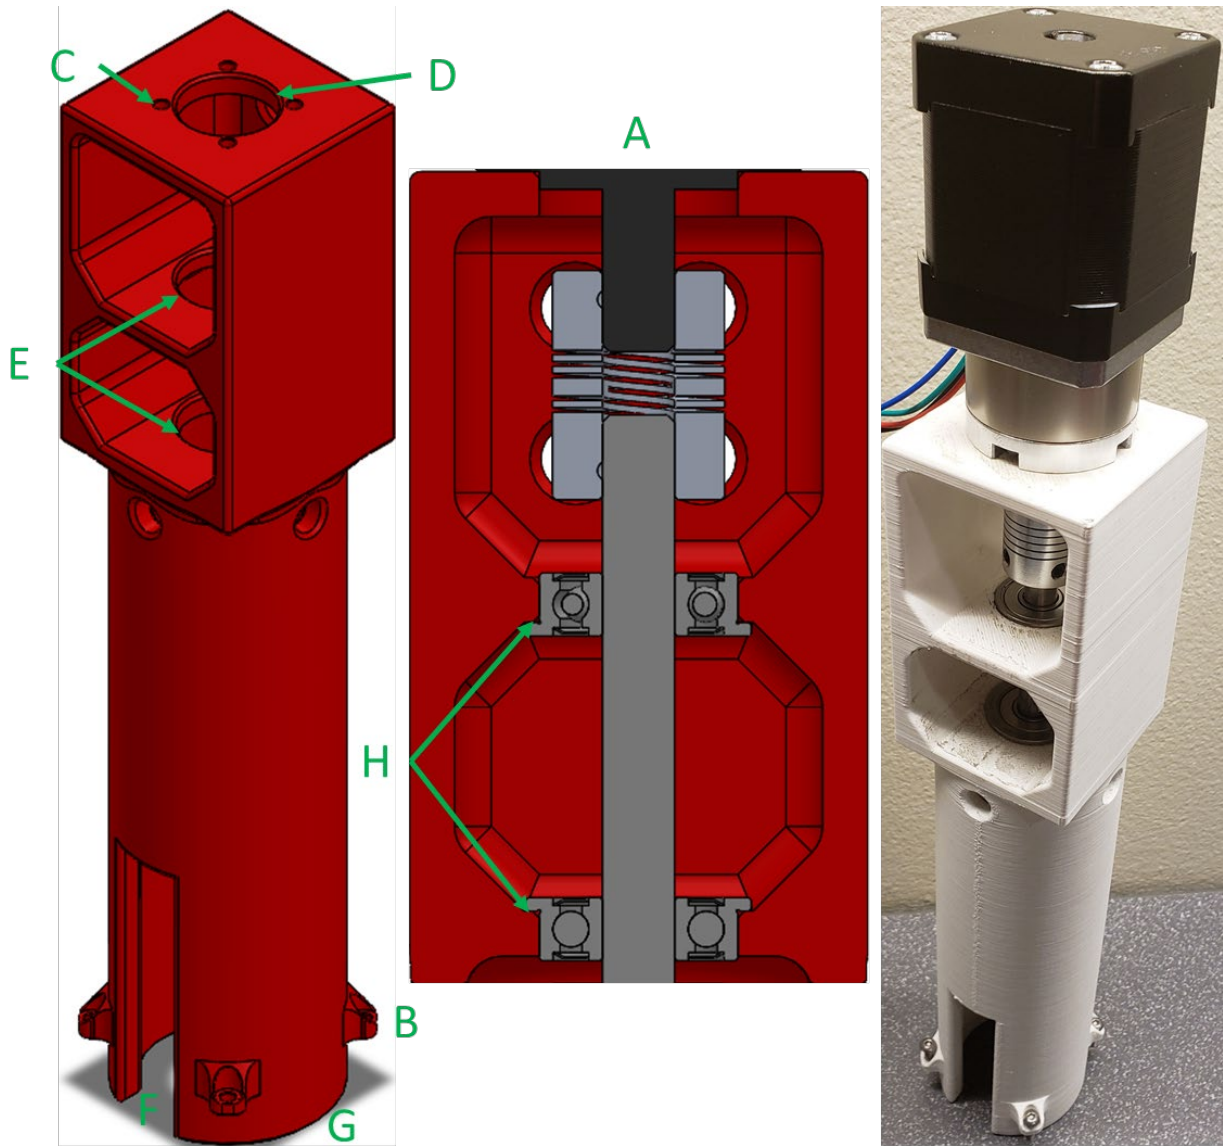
CAD of the version 2 motor mount and a 3D printed prototype. This part is approximately 9.9" tall and is an approximately 2.5" square.
